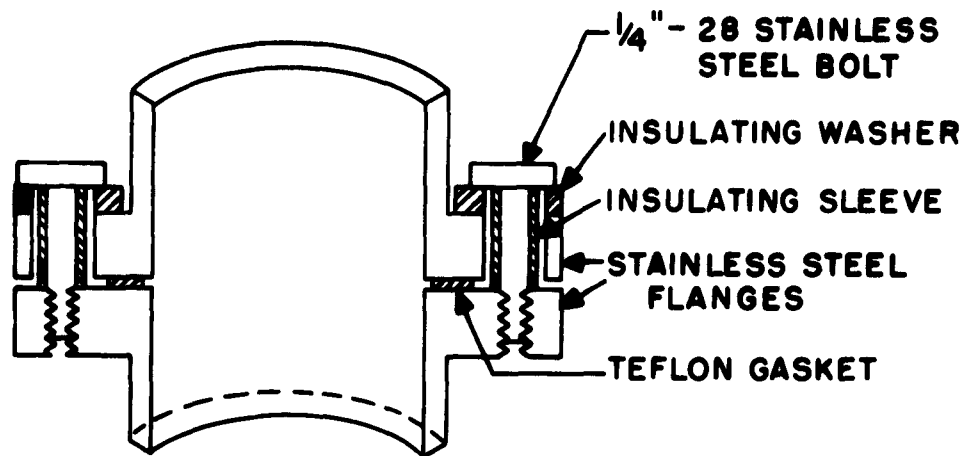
Demountable Vacuum Flange which Provides Electrical Insulation.
